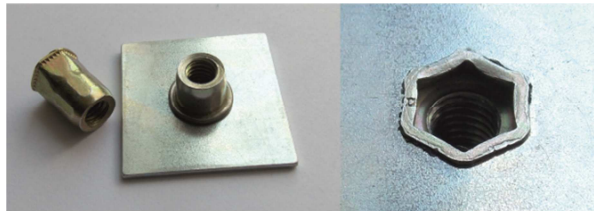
Blind rivet nut with unilateral upset in the hexagonal hole
